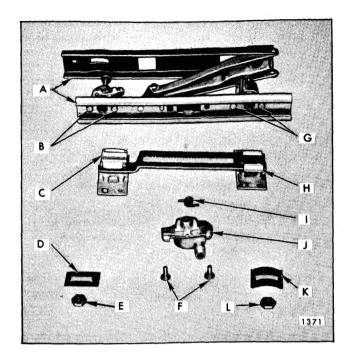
Six-Way Seat Adjuster Components "B & C" Styles
